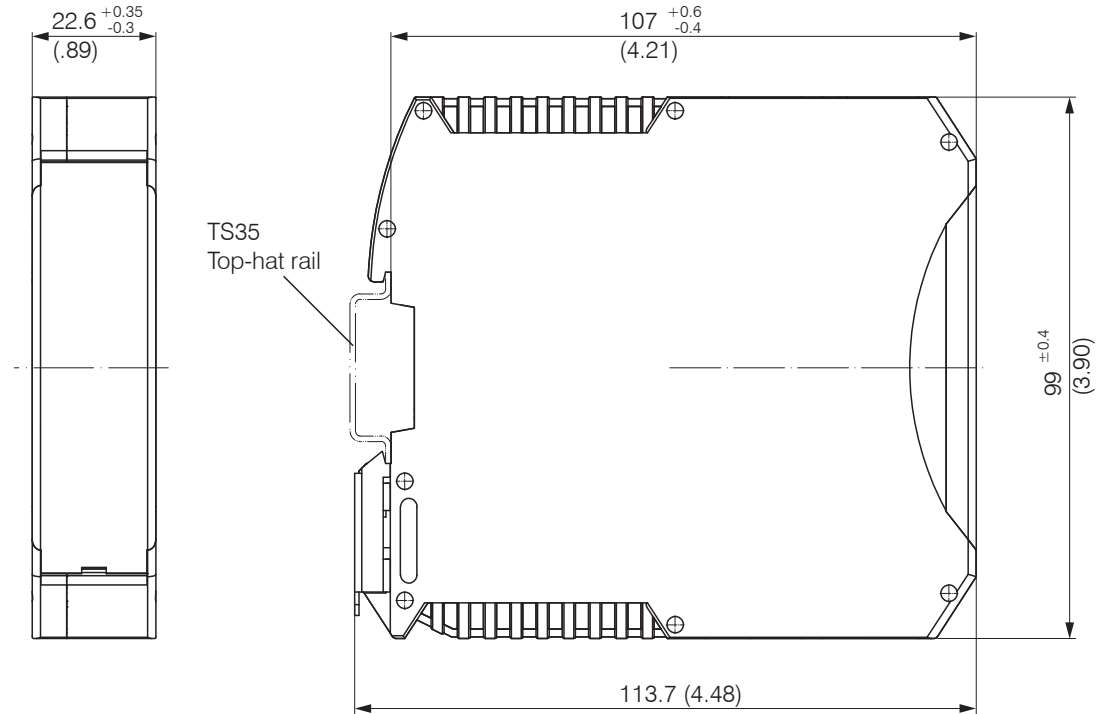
IF2030/PNET dimensional drawing, dimensions in mm (inches)
